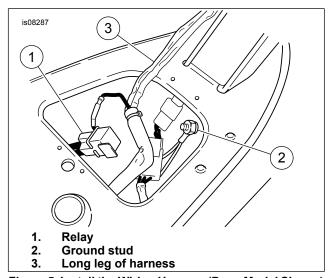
Install the Wiring Harness (Dyna Model Shown)
